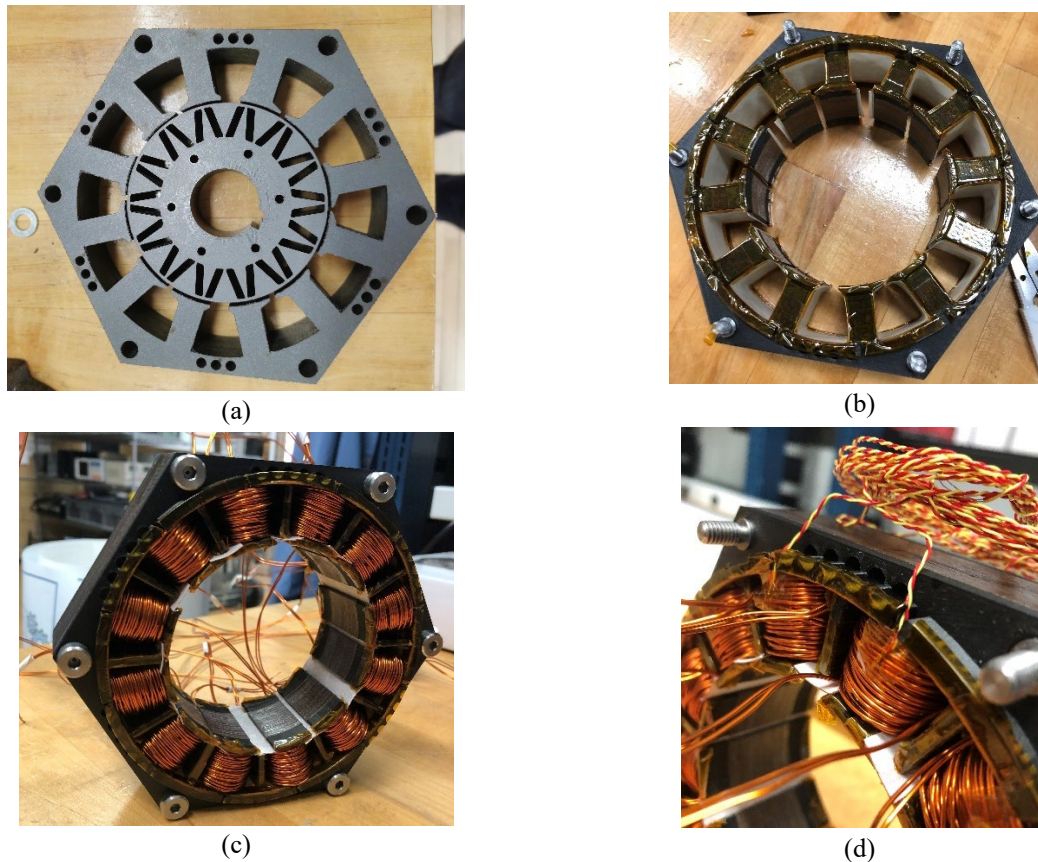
Stator fabrication steps: (a) lamination bonding; (b) endplate and slot liner installation; (c) completed wound stator with spacer wedges; and (d) thermocouple installation.
